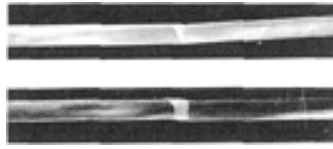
VARIATION IN BEAM VELOCITY AND SUBSEQUENT WARPAGE OF 0.25 MM (0.10 IN.) THICK TYPE 304 STAINLESS STEEL JOINED BY A BUTT WELD. (A) BEAM TRAVERSE, 7110 MM/MIN (280 IN./MIN); TRIANGULAR MELT ZONE. (B) BEAM TRAVERSE, 4190 MM/MIN (165 IN./MIN); PARALLEL-SIDED MELT ZONE. WELD PARAMETERS: 12 KW BEAM POWER; 11.4 MM (0.45 IN.) STANDOFF; HELIUM SHIELDING GAS
